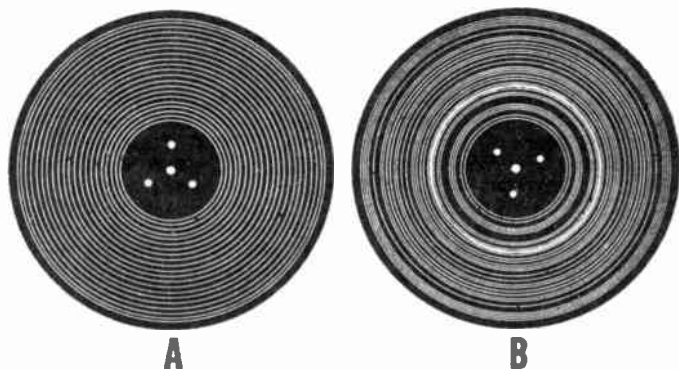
Appearance of records cut with good and bad feed mechanisms. A is good. B is bad.
